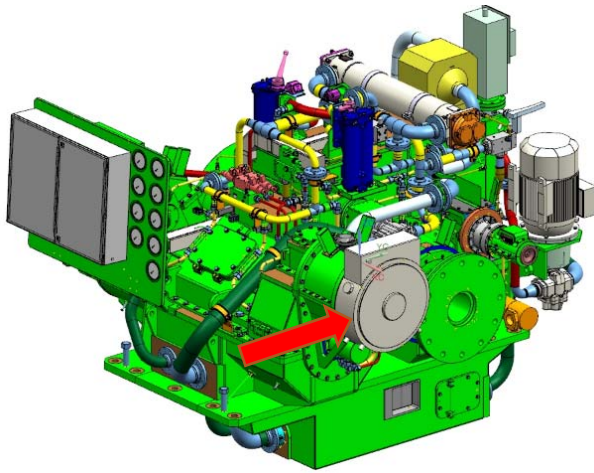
DRS 625 HP PA44 permanent magnet motor integrated onto OPC main reduction gear
